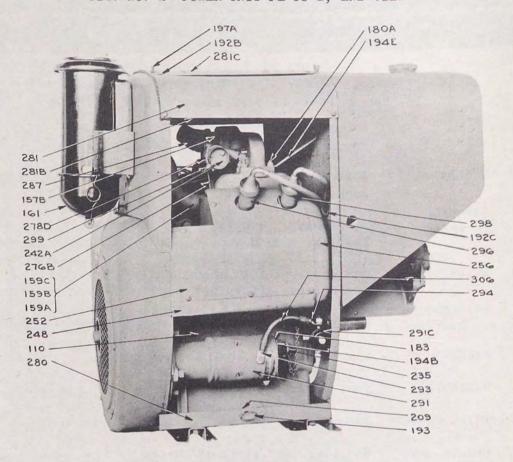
POWER UNIT PE-99-D, ENGINE GENERATOR SIDE
